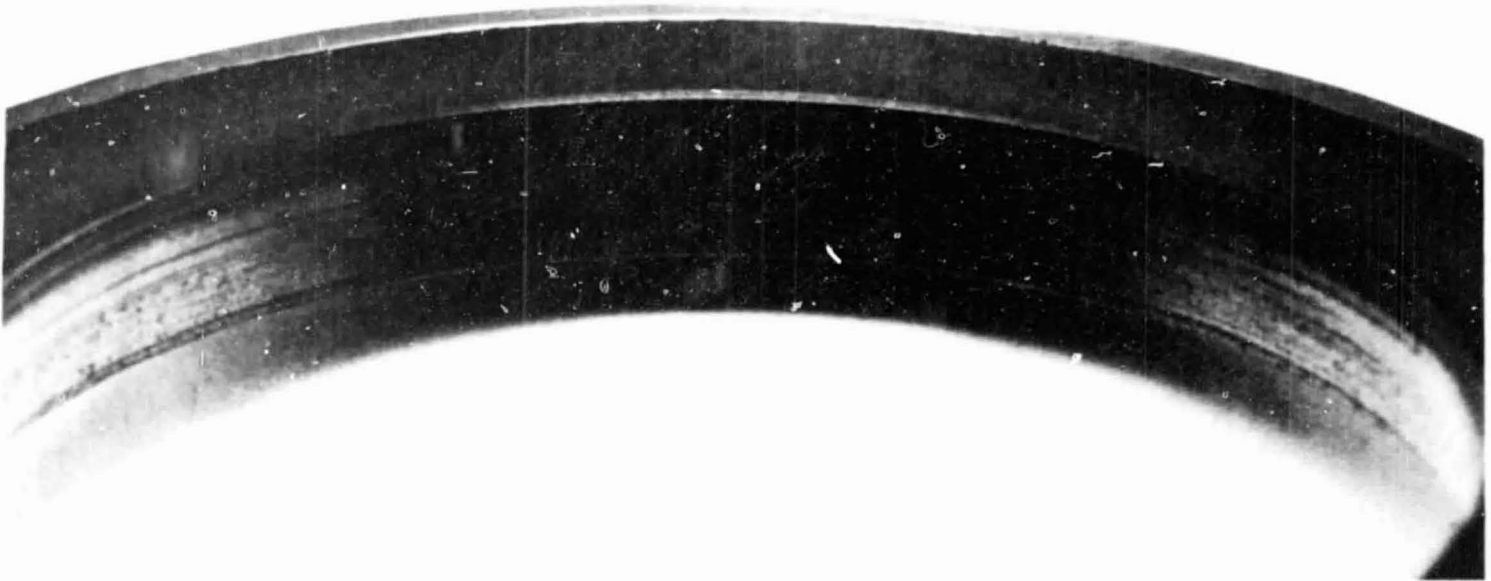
Turbine End Primary Seal Ring, P/N 7R0011525, S/N 047901,
